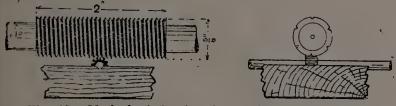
Method of Cutting Coarse Adjustment Pinion.
